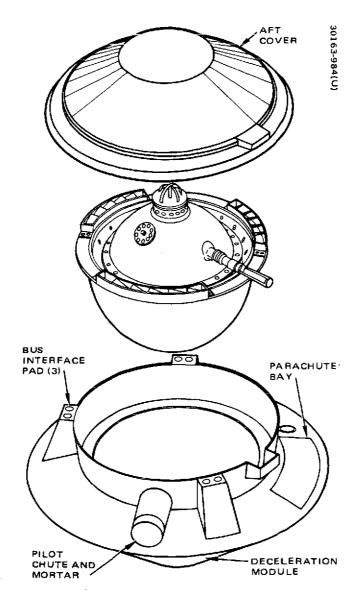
LARGE PROBE EXPLODED VIEW
